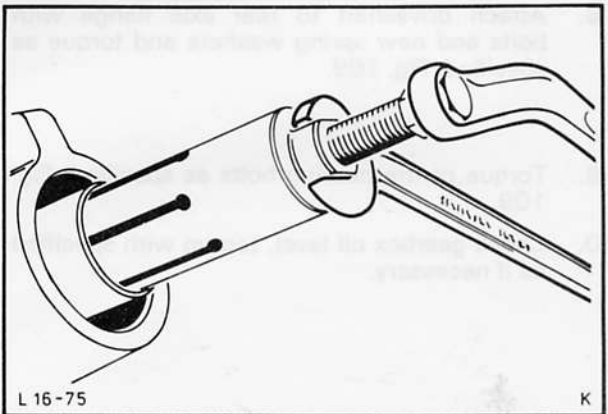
Extract extension housing bush with Special Tool No. 16-011/16-025
